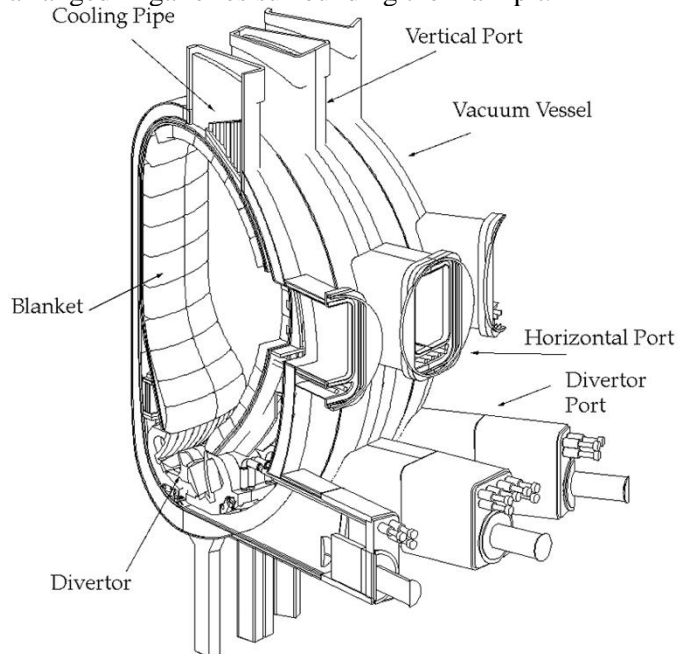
Isometric View of Vacuum Vessel, Blanket and Divertor [11]
